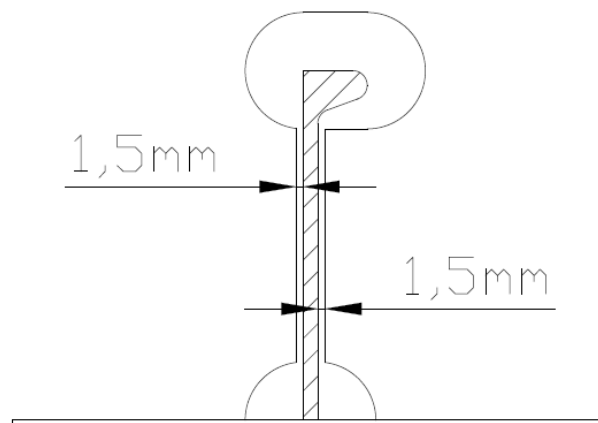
Unit panel and slot construction—sliding on transverses [4]
